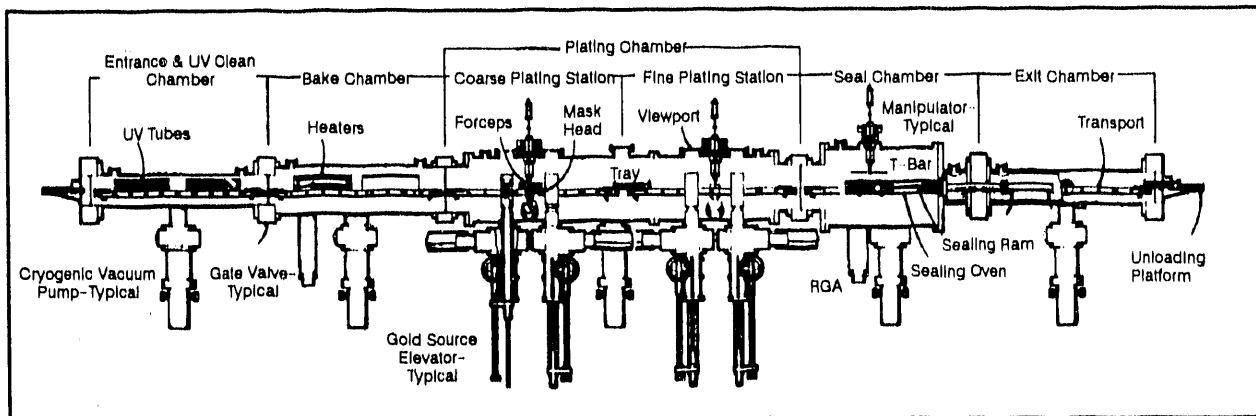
Cross-Section Sketch With Detail to the Inner Workings of the QXFF
